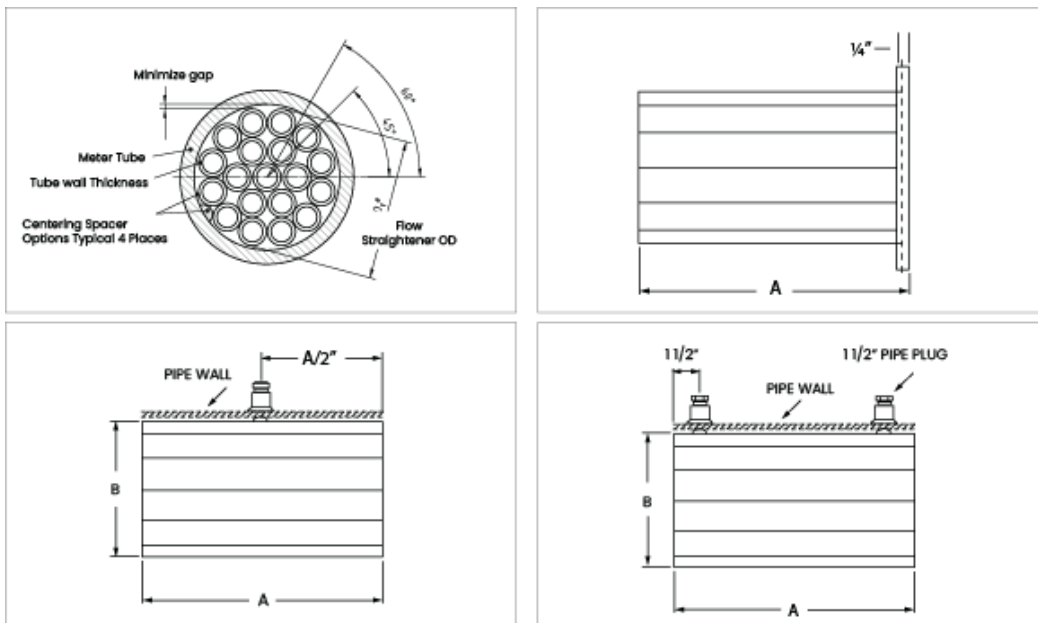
Tube Bundle Type (bolt in style and centre ring / top hat style – top right)
